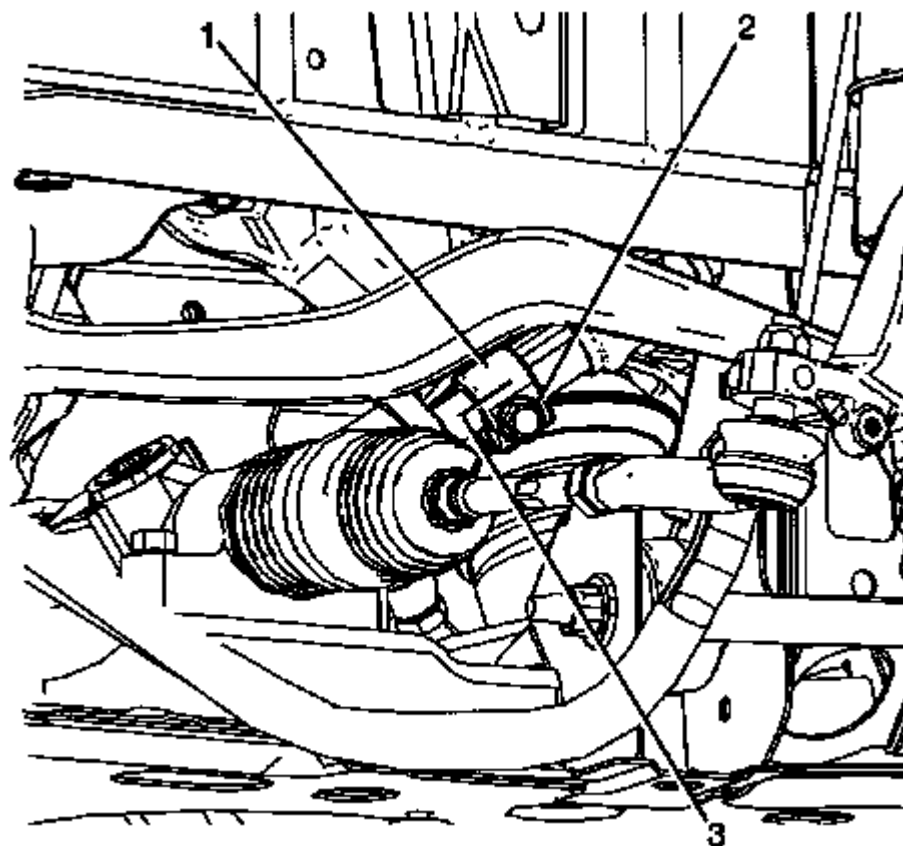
Identifying Intermediate Steering Shaft To Pinion Shaft Retaining Bolt
